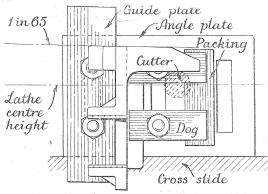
Casting set up on angle plate for machining inclined surfaces.
